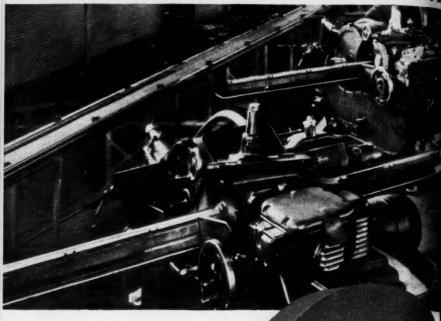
The blocks come to these machines on the lower conveyor line at the left and are pushed directly onto the elevating section, with which they are elevated to the level of the three conveyor lines extending through the machine.
